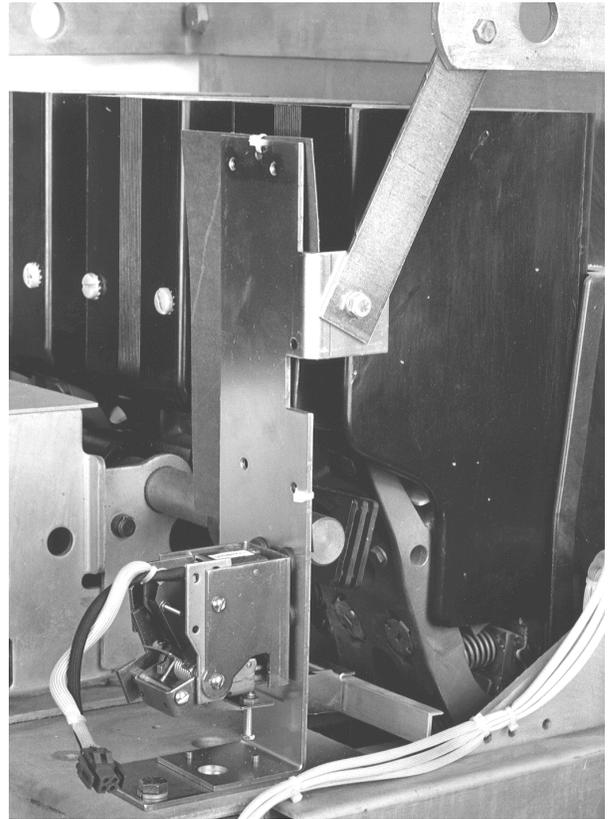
Installed flux shifter and trip unit mounting bracket (DB-50).
